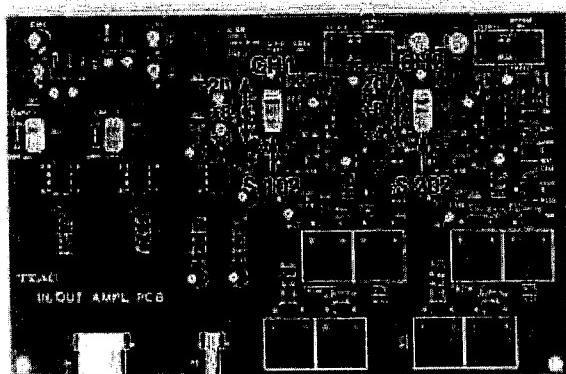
INPUT/OUTPUT AMPLIFIER PCB ASSEMBLY.
